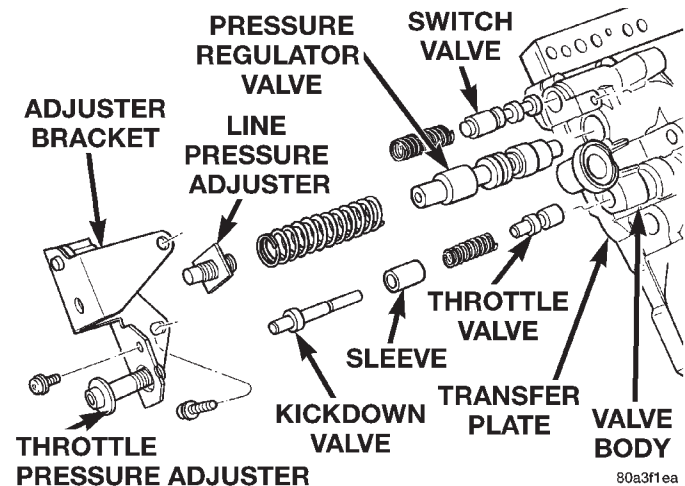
Adjusting Screw Bracket, Springs, and Valves
